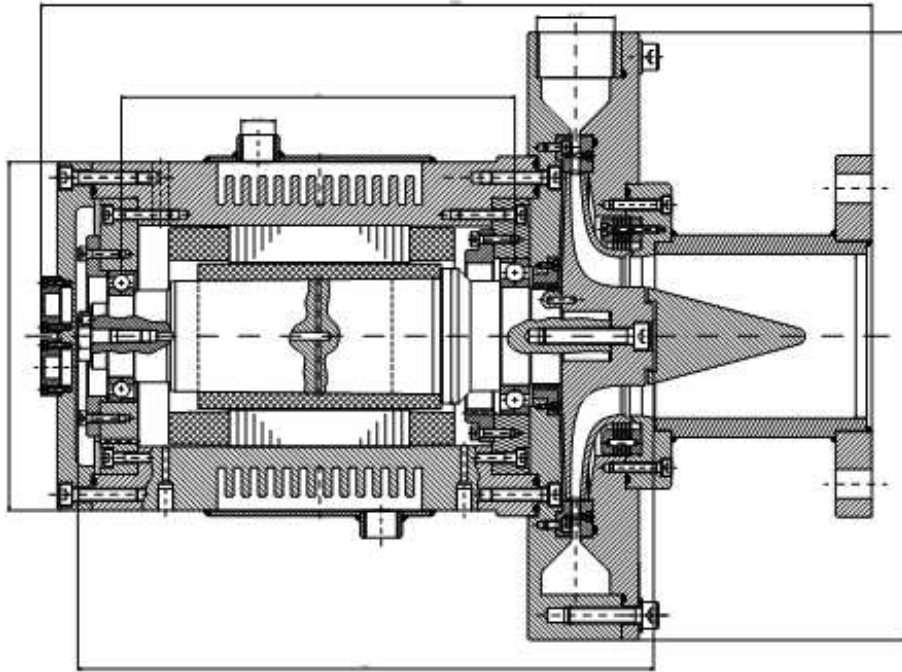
Assembly drawing of the SES 36 turbogenerator.
